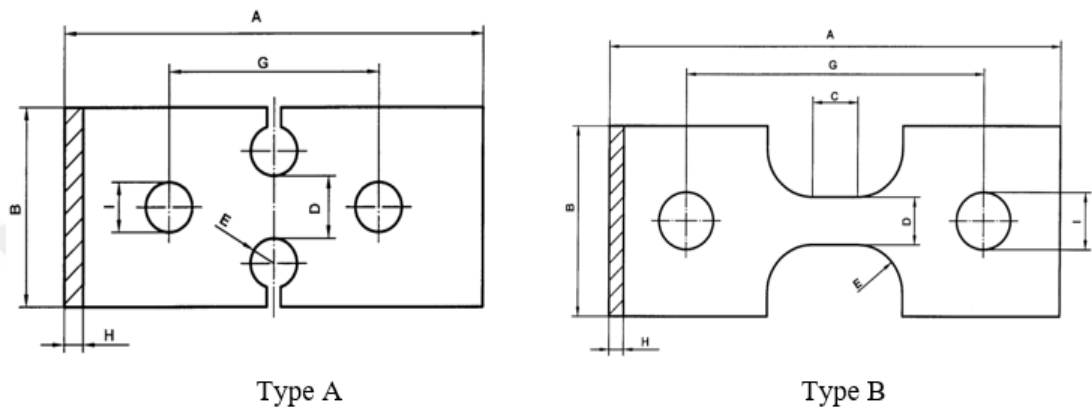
Type A-sample specimen for butt fused pipes with thickness $e < 25$ mm, Type B-sample specimen for butt fused pipes with thickness $e \geq 25$ mm (ISO 13953, 2001)
